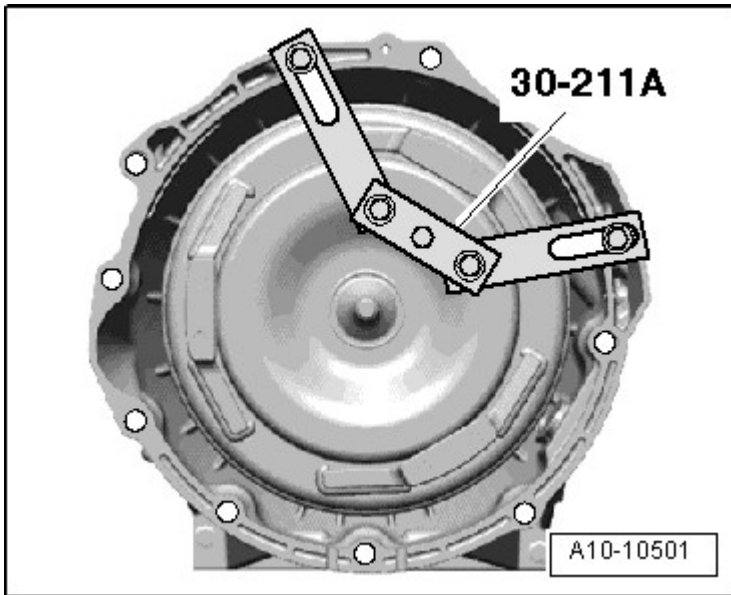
Identifying Bracket -30-211A- Attached To Secure Torque Converter
